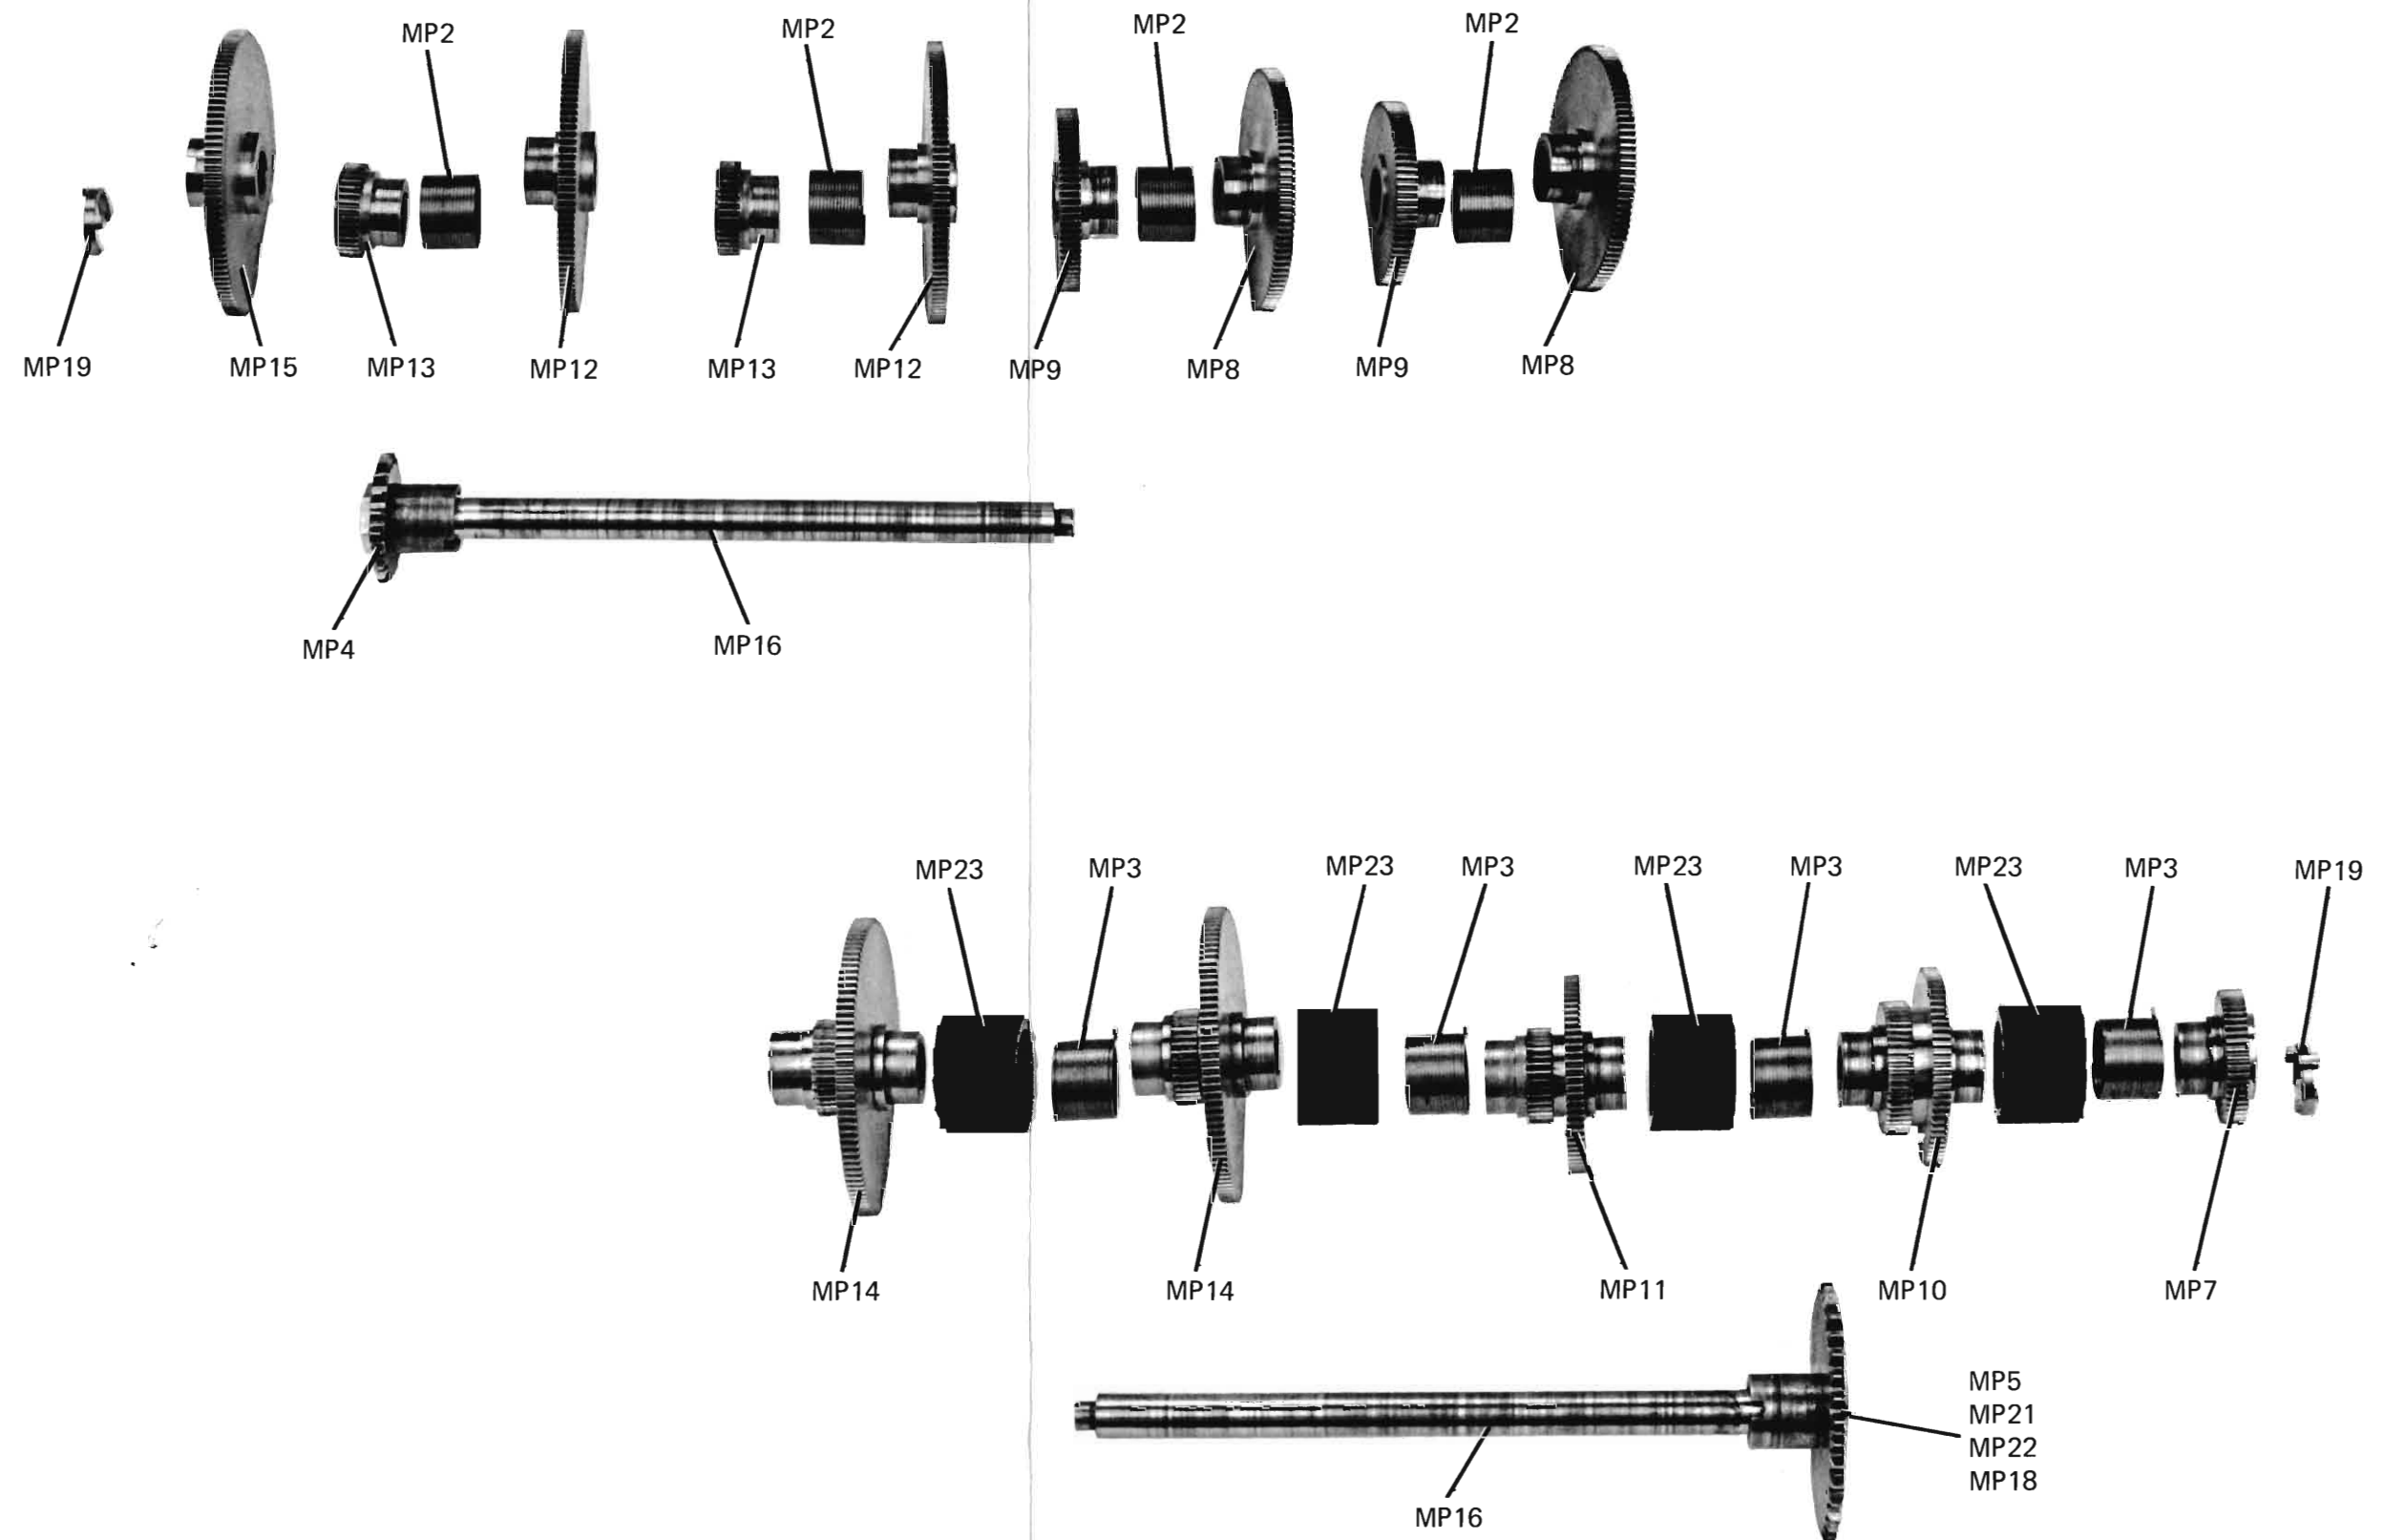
Gearbox A10A1 (07754-60040), Parts Location Diagrams
